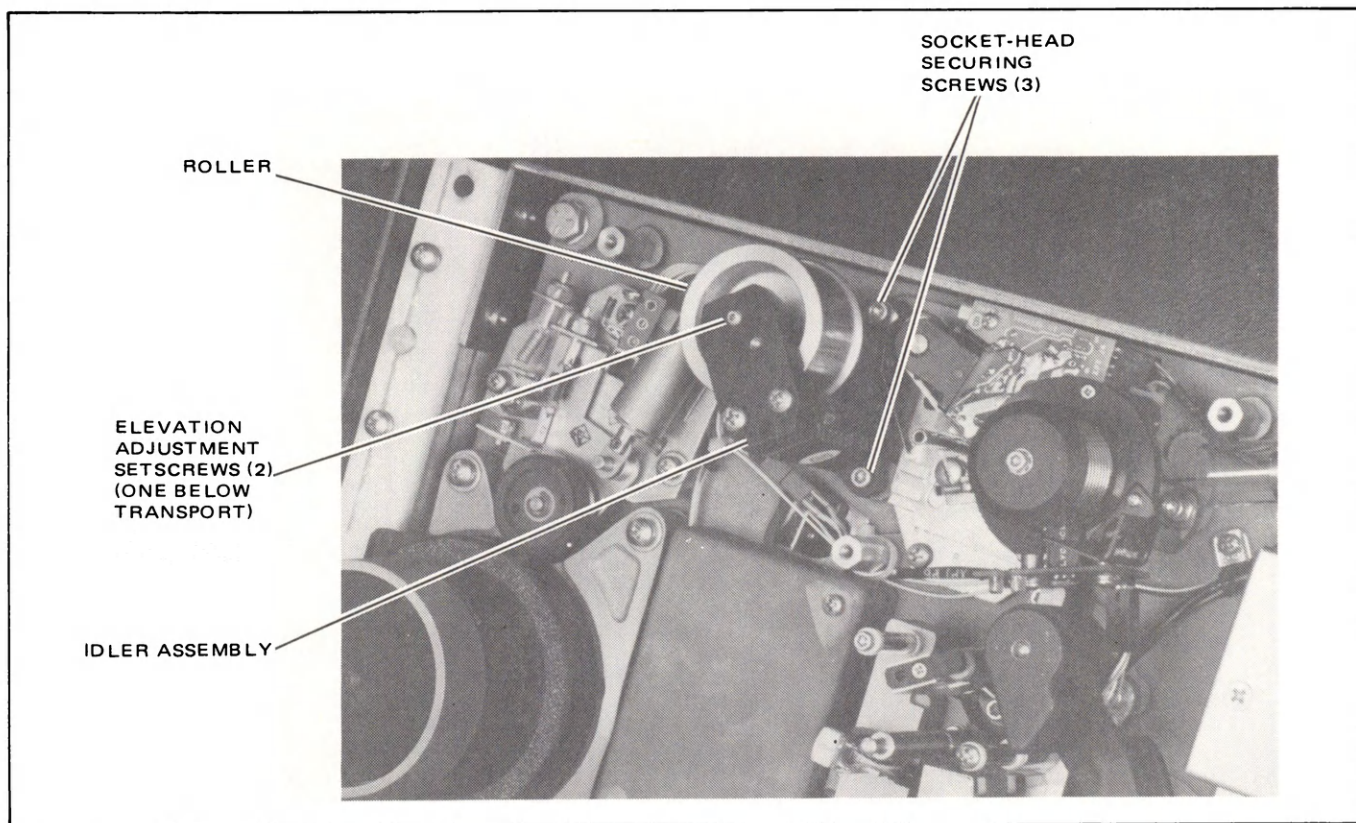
Idler Assembly (Turnaround) Removal and Adjustment
